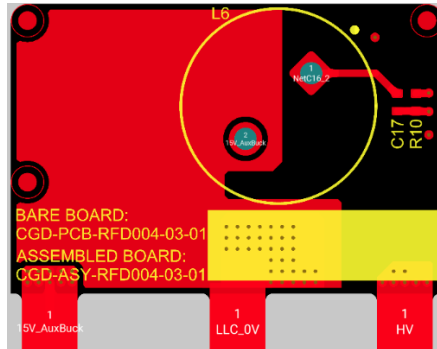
LV auxiliary supply daughterboard layout: top layer
